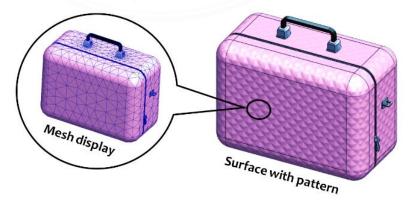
Design C –Printed Pattern Provided on The Body's Surface: Mesh Model Showing Smooth Surface Without Texture.
